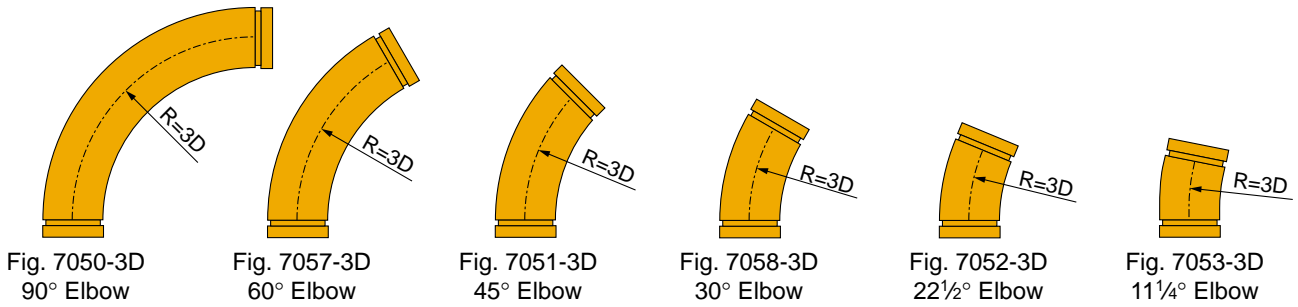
D 90° ELBOW				FIG. 7057-3D 60° ELBOW		FIG. 7051-3D 45° ELBOW		FIG. 7058-3D 30° ELBOW		FIG. 7052-3D 22½° ELBOW		FIG. 7053-3D 11¼° ELBOW
